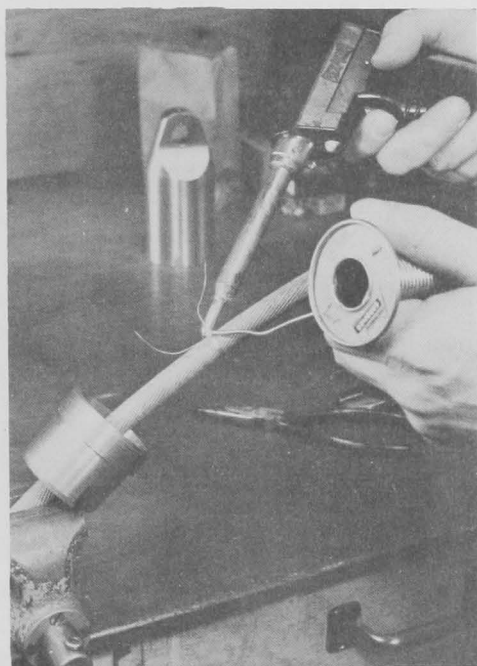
Operation 1. Slip the socket section of the sensing-unit housing onto the cable to a position 10 to 12 inches from the cut end. Wind several turns of small-diameter tinned seizing wire around the cable to form a band approximately one-eighth inch wide, 7 inches from the same end. Twist the ends together, solder, and clip off excess wire at the twist. DO NOT ATTEMPT TO SOLDER THE BAND TO THE CABLE.
